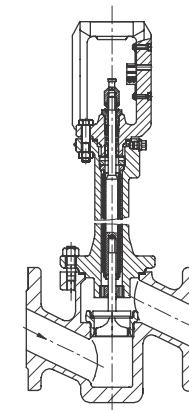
Type 3241 Valve, forged steel version, DN 15 to 80, with bellows seal
